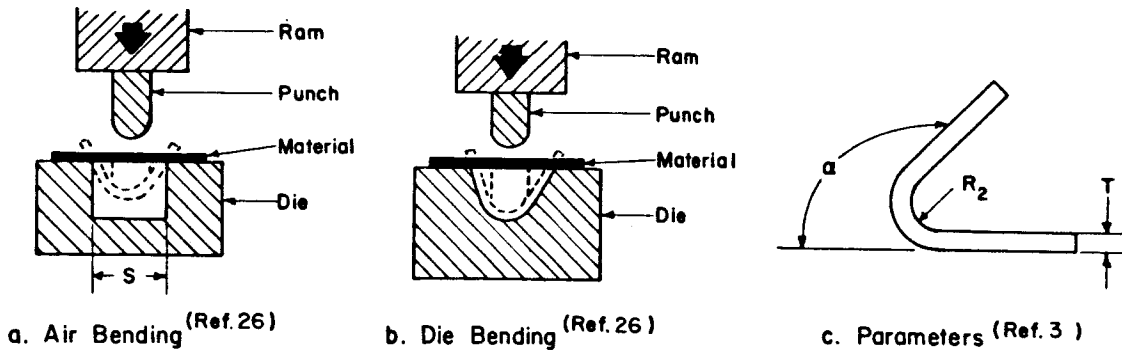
TYPICAL BRAKE-FORMING SETUPS AND PARAMETERS
